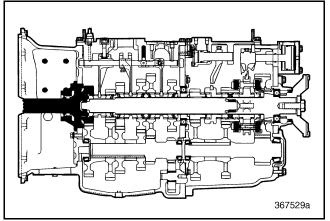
Main Drive Pinion Component Locator (T313L/T318L Shown)
